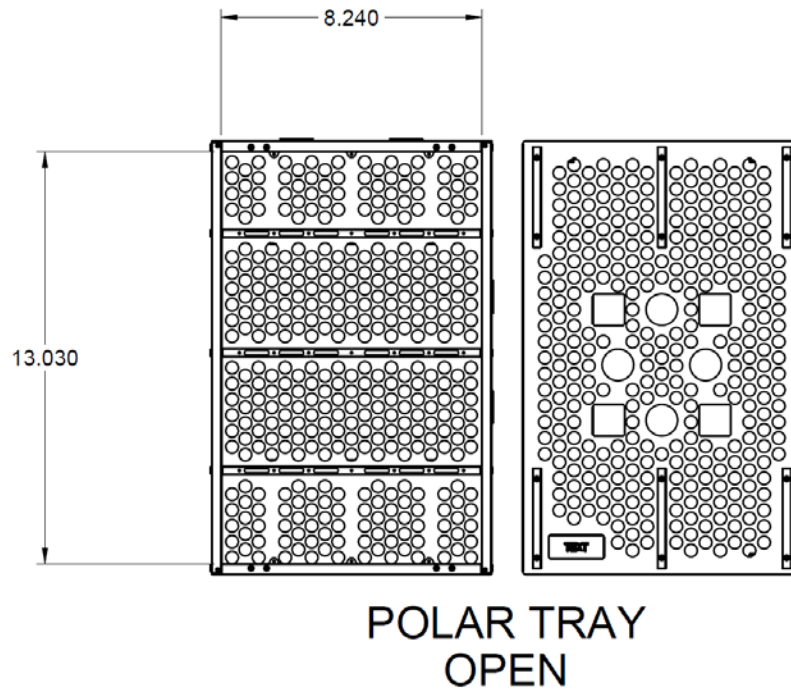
POLAR TRAY LID REMOVED DIMENSIONS TO INSIDE OF LIP
